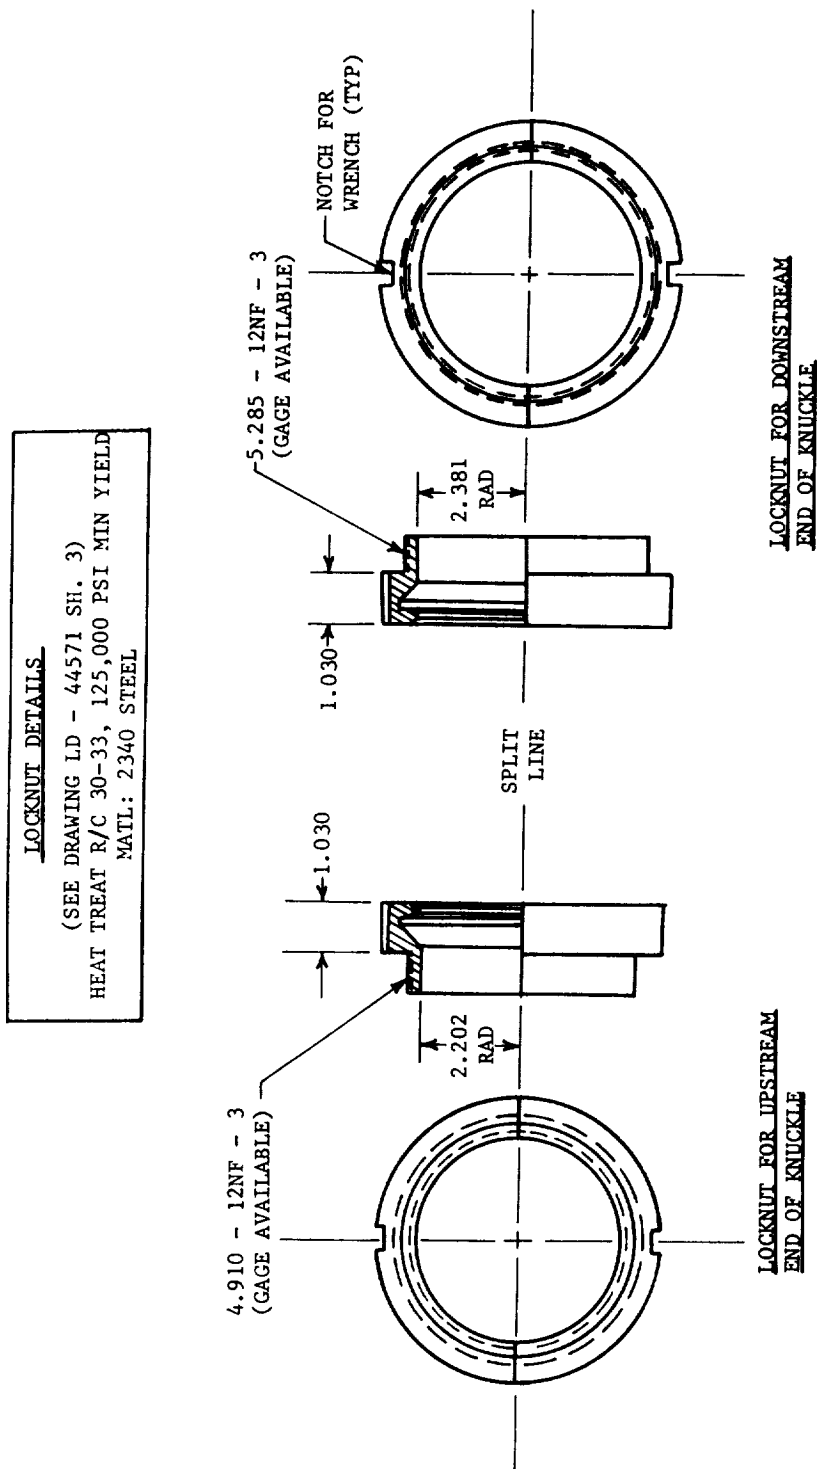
Sketch of split locknuts used to seat knuckle tapers. (All dimensions are in inches unless otherwise indicated.)
